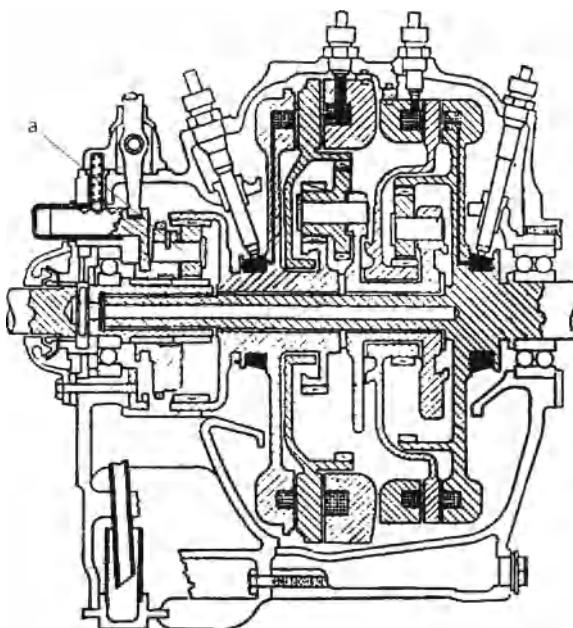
Semi-automatic gearbox produced by Cotal starting from 1934. The different elements of planetary gears are braked by electromagnets. The reverse gear is engaged manually (from Genta and Morello 2009)
